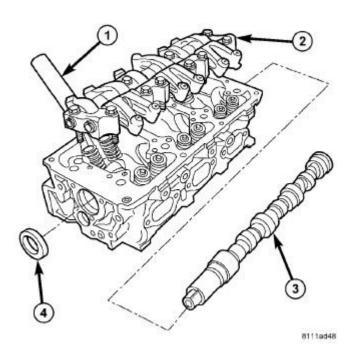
CAMSHAFT, ROCKER ARM ASSEMBLY AND CYLINDER HEAD Courtesy of CHRYSLER LLC
